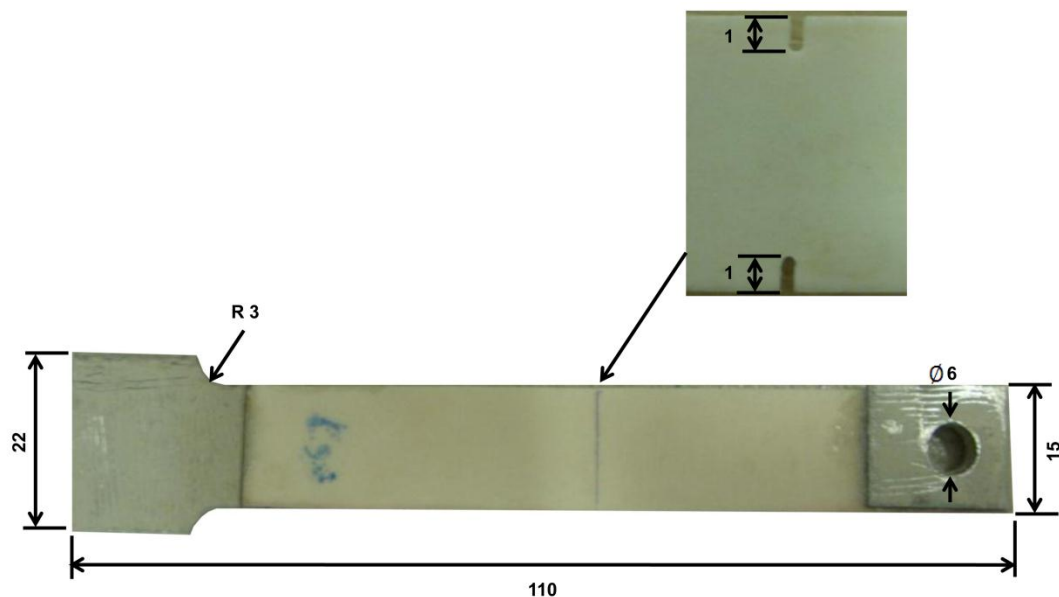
Dimensions and shape of specimens with notches for tensile-impact tests; specimen thickness 3 mm. Dimensions in mm
